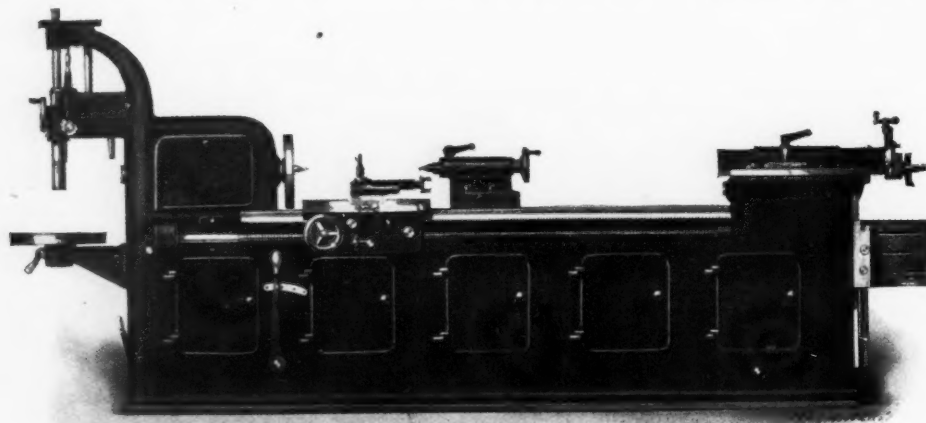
Linderman Universal Machine Tool arranged for the Lathe, Drill Press, Shaper Combination
